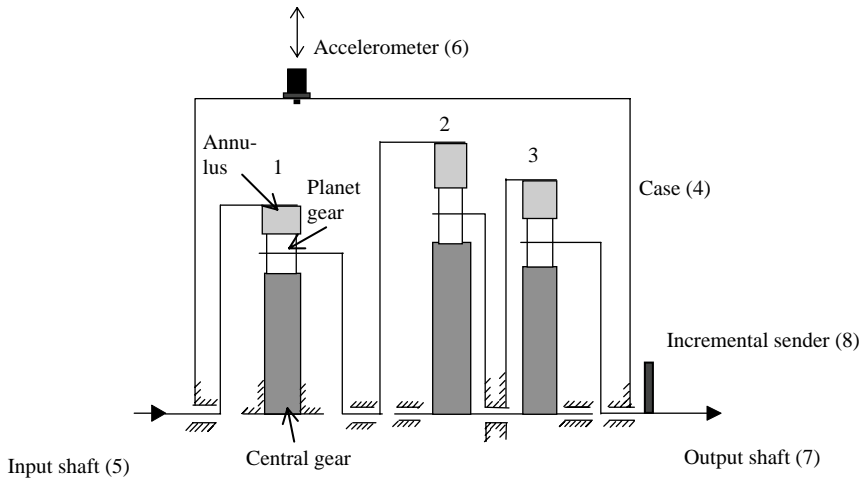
Kinematic schema of the investigated passenger car gear with three sets of planet gear (1, 2, 3).
